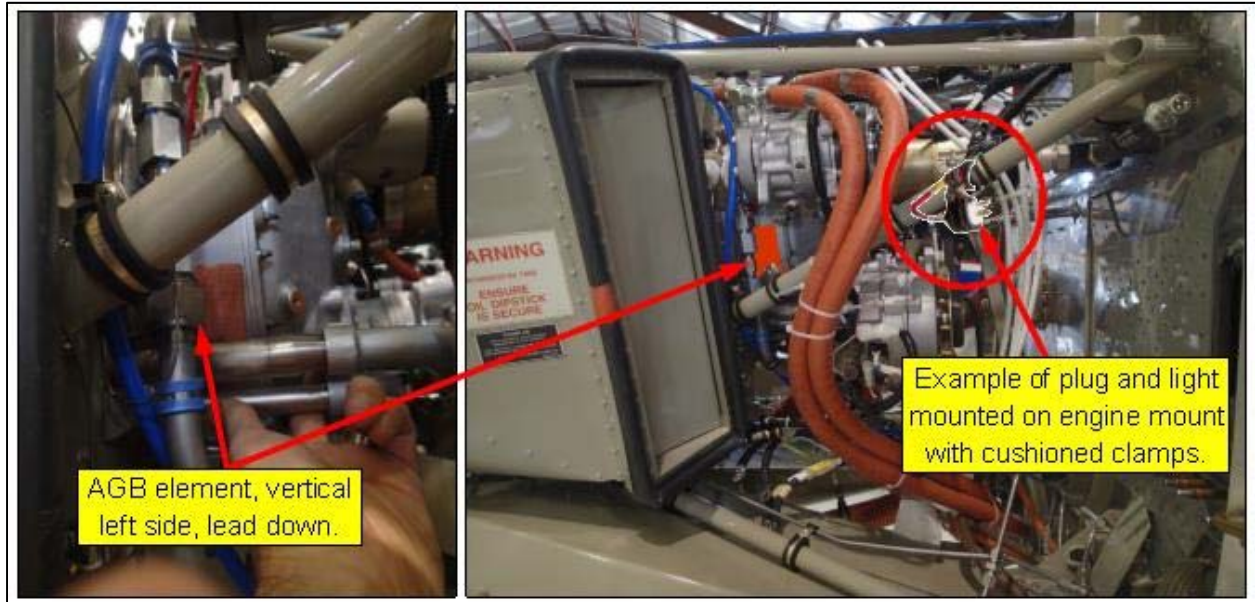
TEP3050- Left side of AGB tank. Example of optional circular plug secured with cushioned clamps on left engine mount engine mount.
